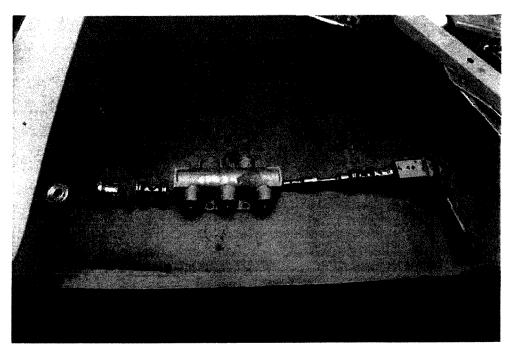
Disassembled Valve Removed from Trailer Unit 6775
